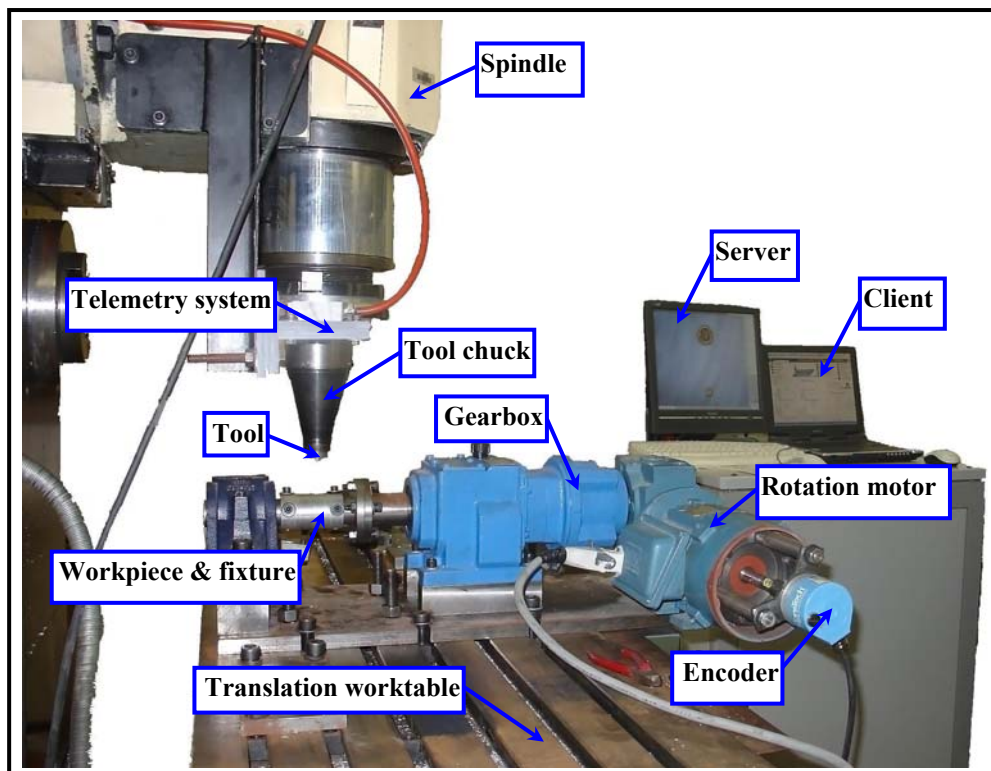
FSW machine with additional rotation axis implemented for this project
